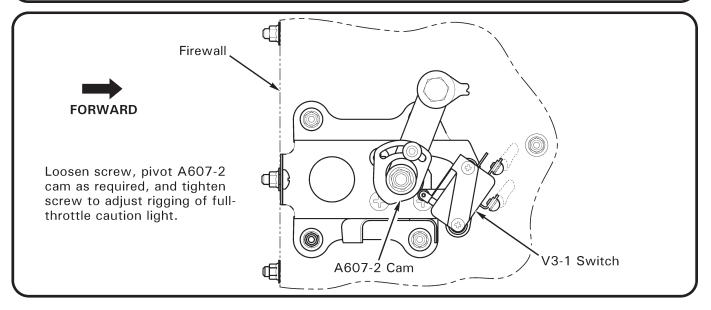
FULL THROTTLE CAUTION LIGHT RIGGING CHECK
